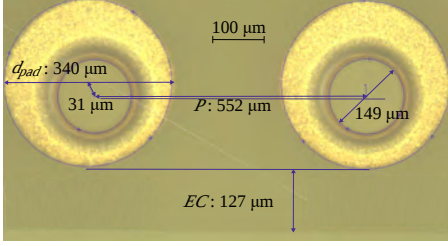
Microscope image: Dimensional measurement of the prototype.
